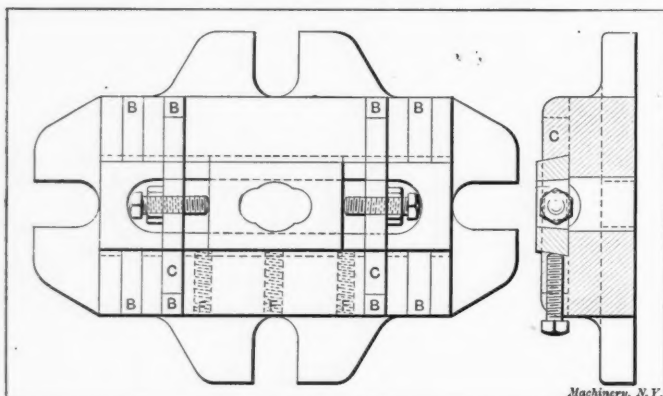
Die-bed of the Dovetailed and Side Set-screw Type, also secured by End-thrust Set-screws
